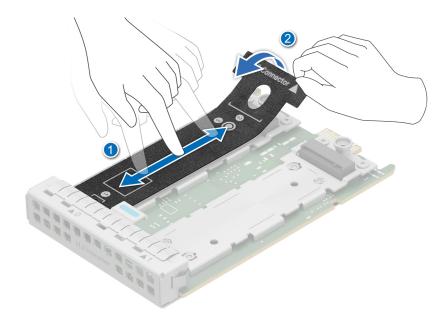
Pasting the new thermal pad on the board and removing the black mylar
